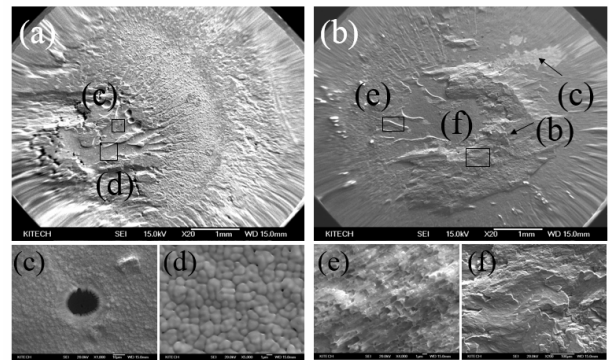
SEM images of the fractured weld zone Al5052(a), DP590(b) with 11.5kA; (c), (d), (e) and (f) higher magnification view of the weld; (c) welding voids, (d) dendrites, (e) ductile fracture characteristics (fine dimple), (f) cleavage fracture characteristics.
